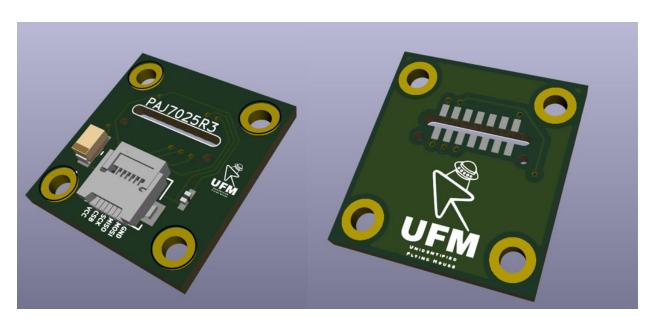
3D Render of Custom PixArt Sensor PCB Front and Back View Iteration 2
